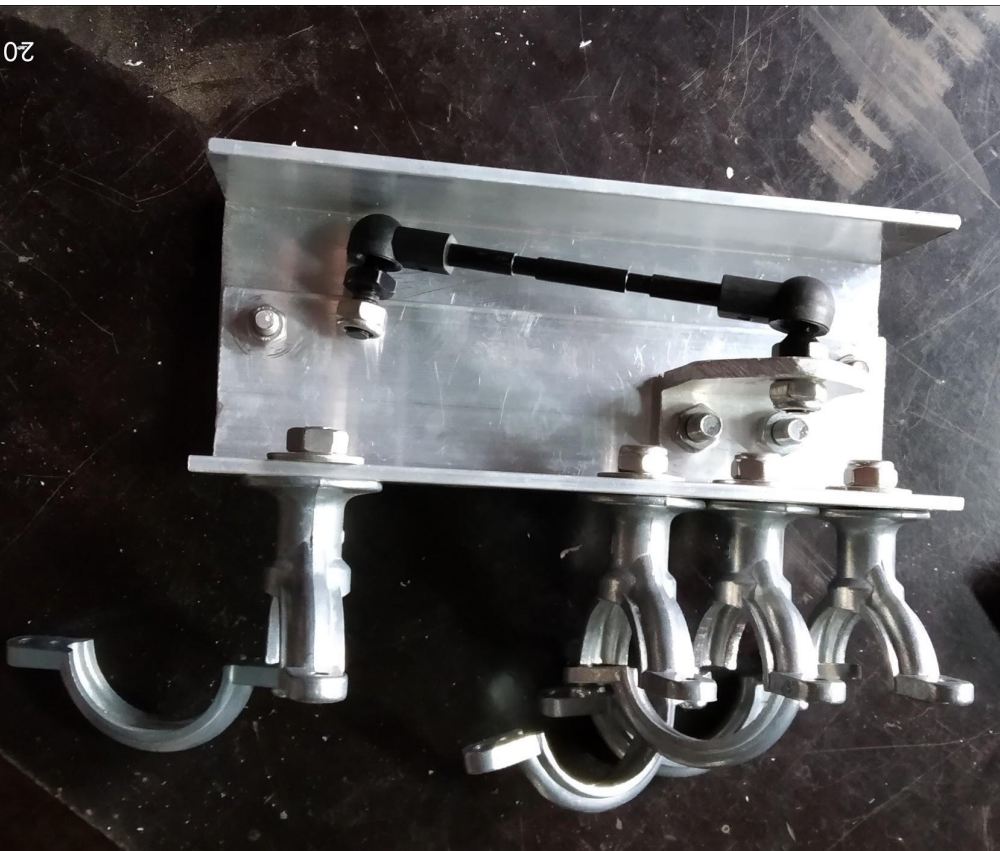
Wheel Angle Sensor Rod In-line with Connector when Steering Mechanism is Straight
